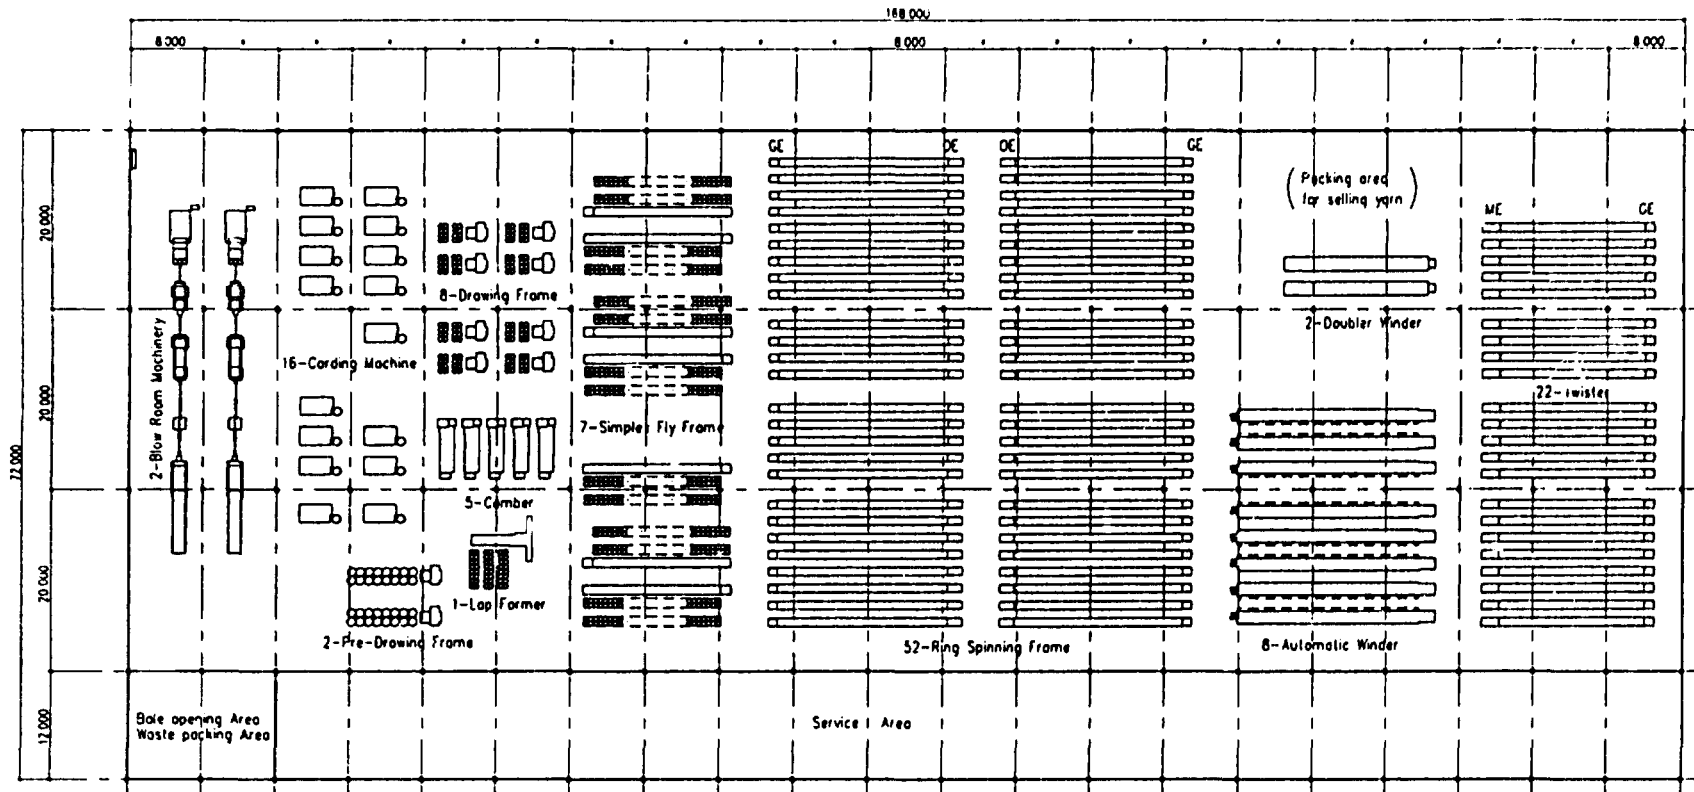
LAYOUT OF PRODUCTION MACHINERY: SPINNING MILL (Case-2) -1
